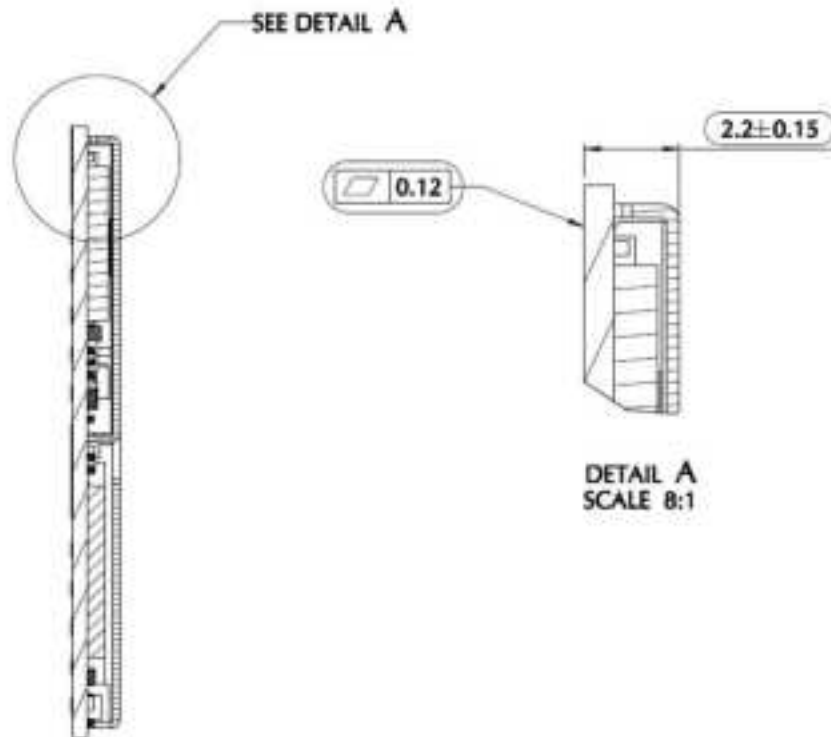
LE910Cx Mechanical Dimensions (Side view) except for LE910C1-SV and -SVX
